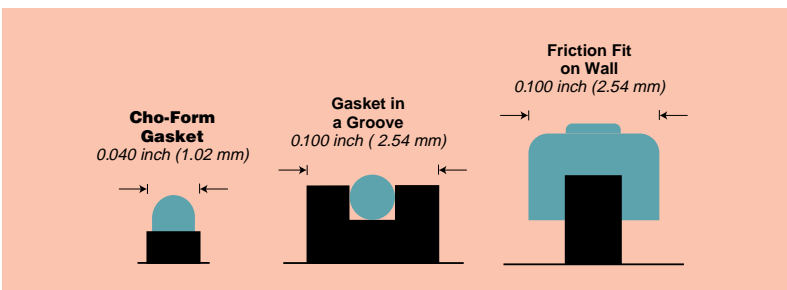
Cho-Form gaskets applied to narrow flanges typically use 60% less space than other gasket designs
